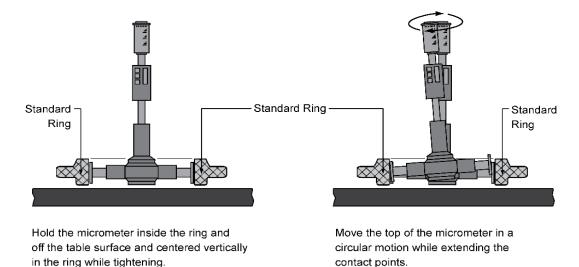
Techniques for Using the Three-Point Bore Gauge with the Calibrated Master Ring
